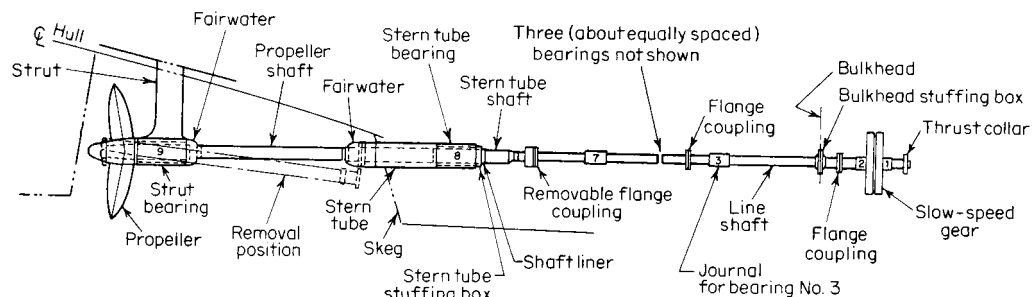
Shafting arrangement with strut bearings. (From "Marine Engineering," SNAME, 1992.)
